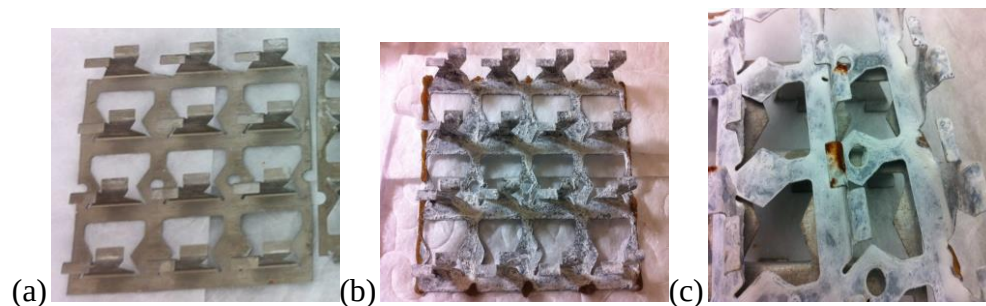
7 days of NSS testing of a (a) aluminum, (b) 55% Al-Zn coated steel (0.0157" thick) and (c) G90 galvanized steel (0.018" thick) structured panel. No
